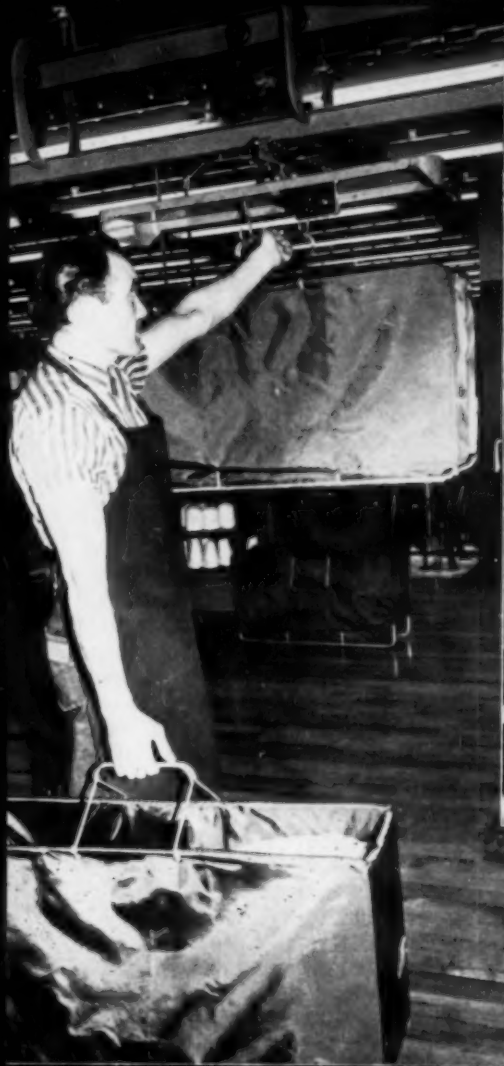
A knitter removes empty hose container from the conveyor, which will be replaced by a full one.
